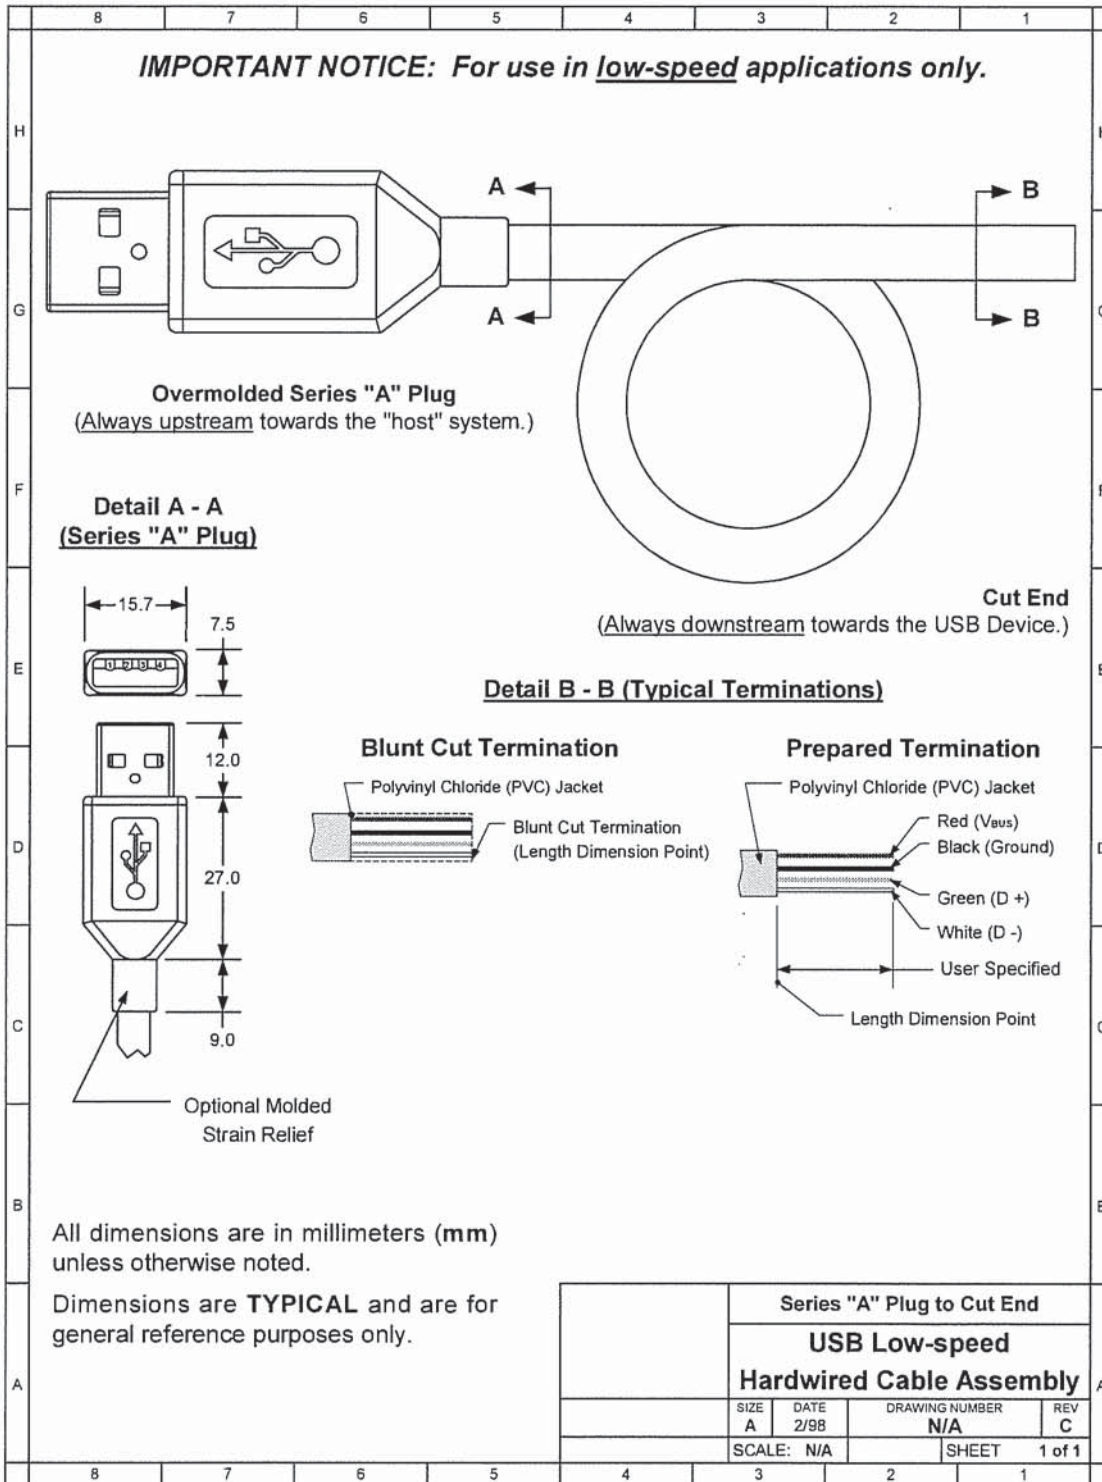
USB Low-speed Hardwired Cable Assembly
